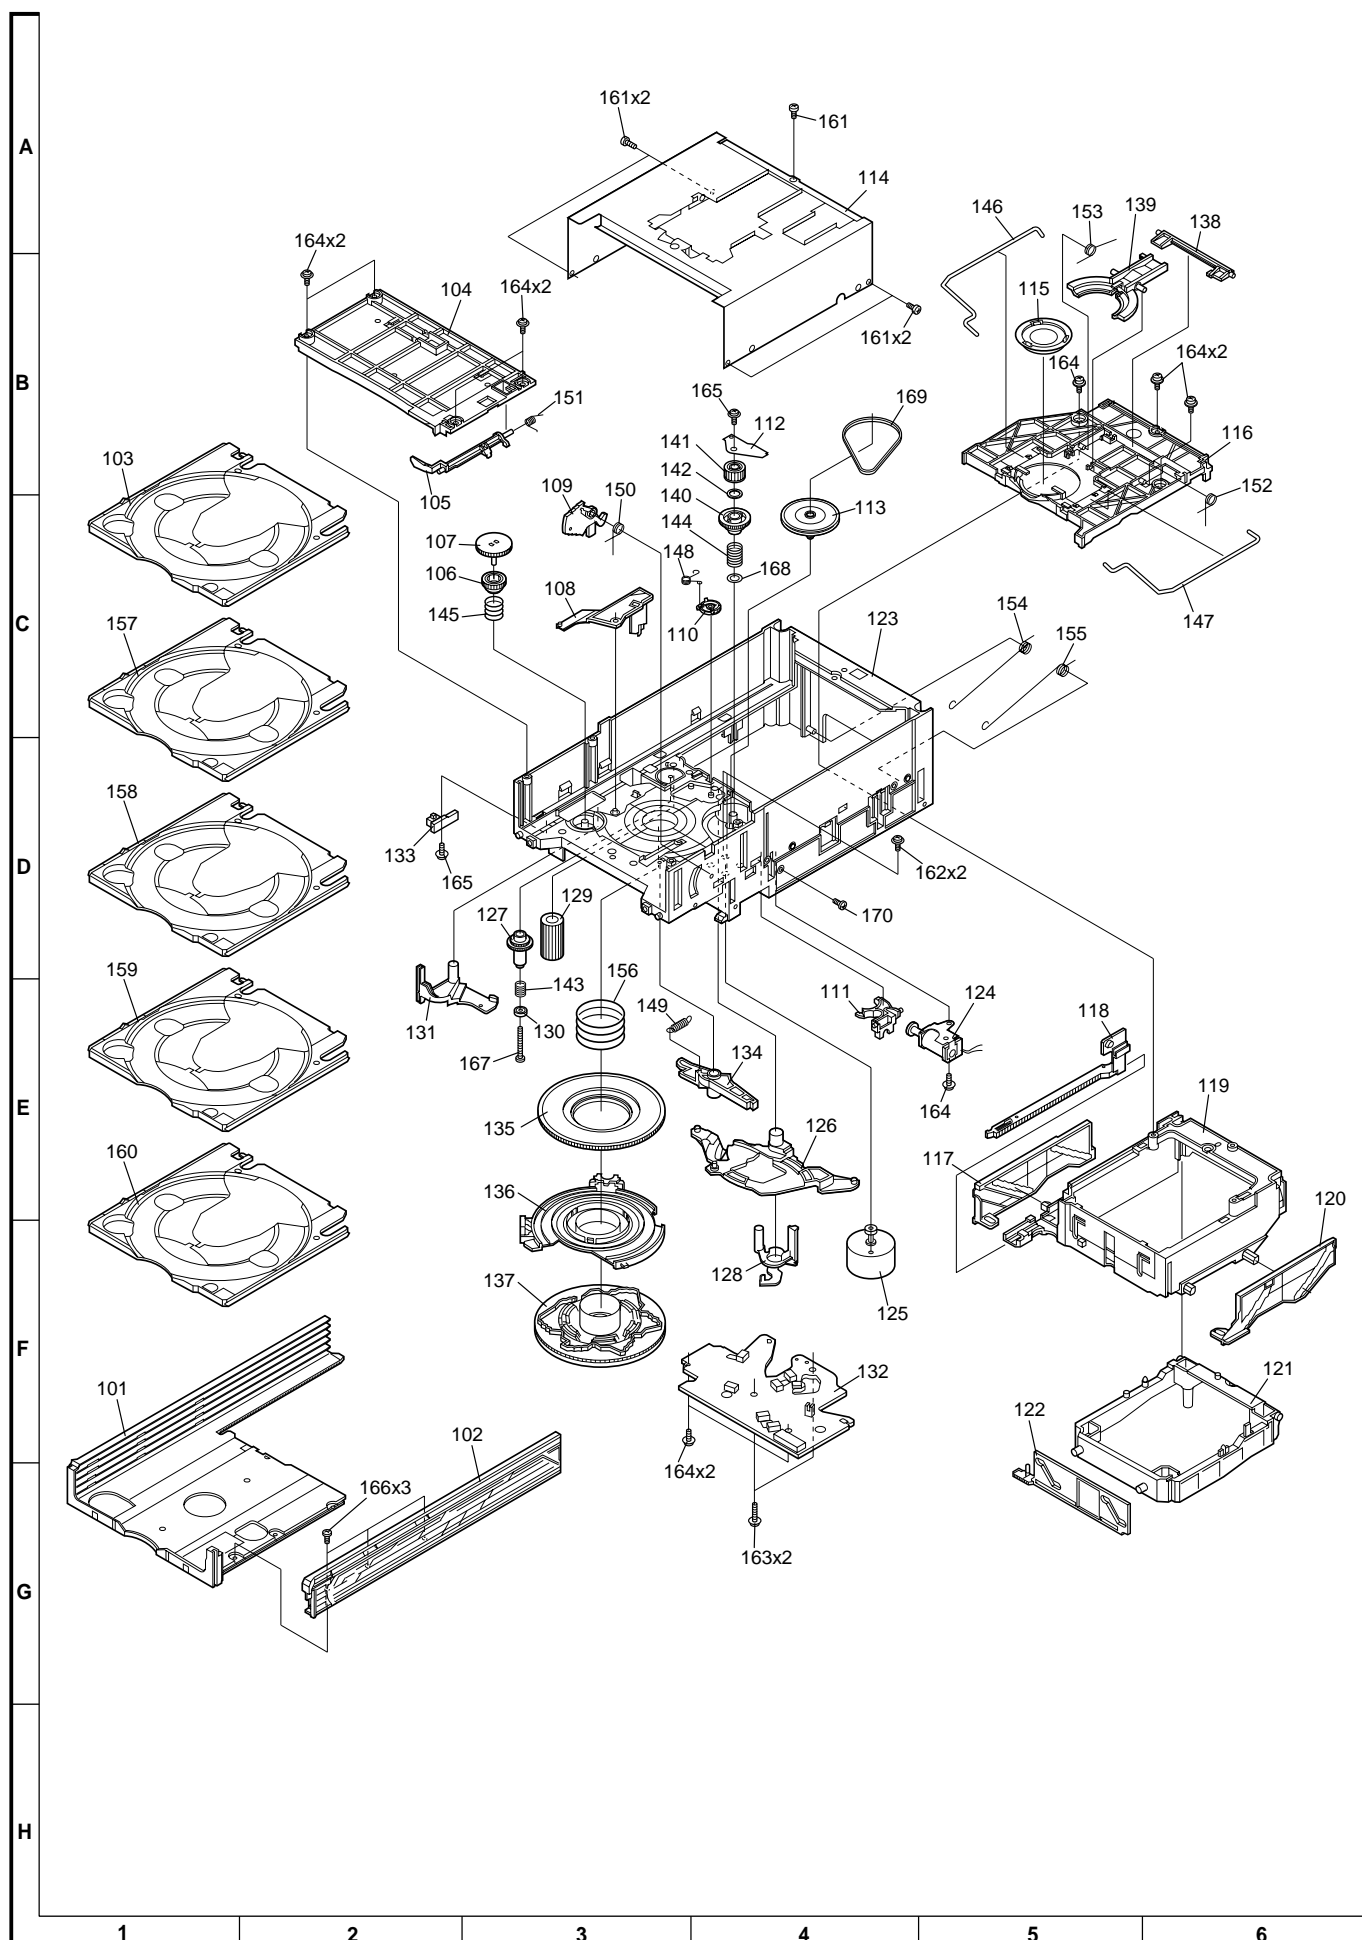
CD CHANGER MECHANISM EXPLODED VIEW
